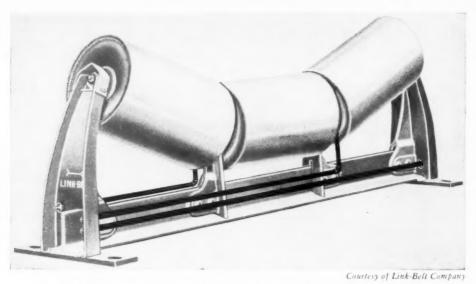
A Link-Belt conveyor idler showing grease pipe extensions for lubricating the idler rolls from one side of the conveyor.
